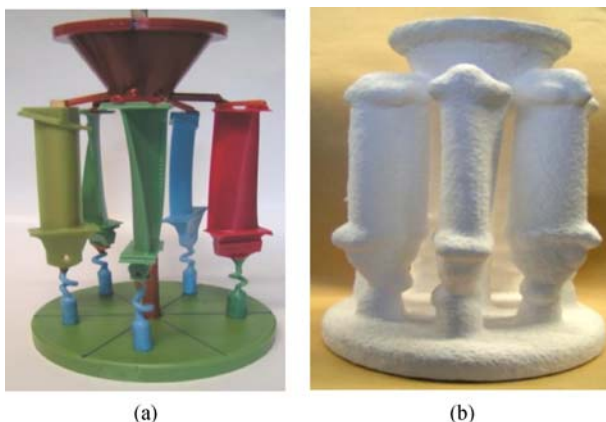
(a) Circular-clustered wax assembly; (b) the corresponding shell mold manufactured for casting SC blades
